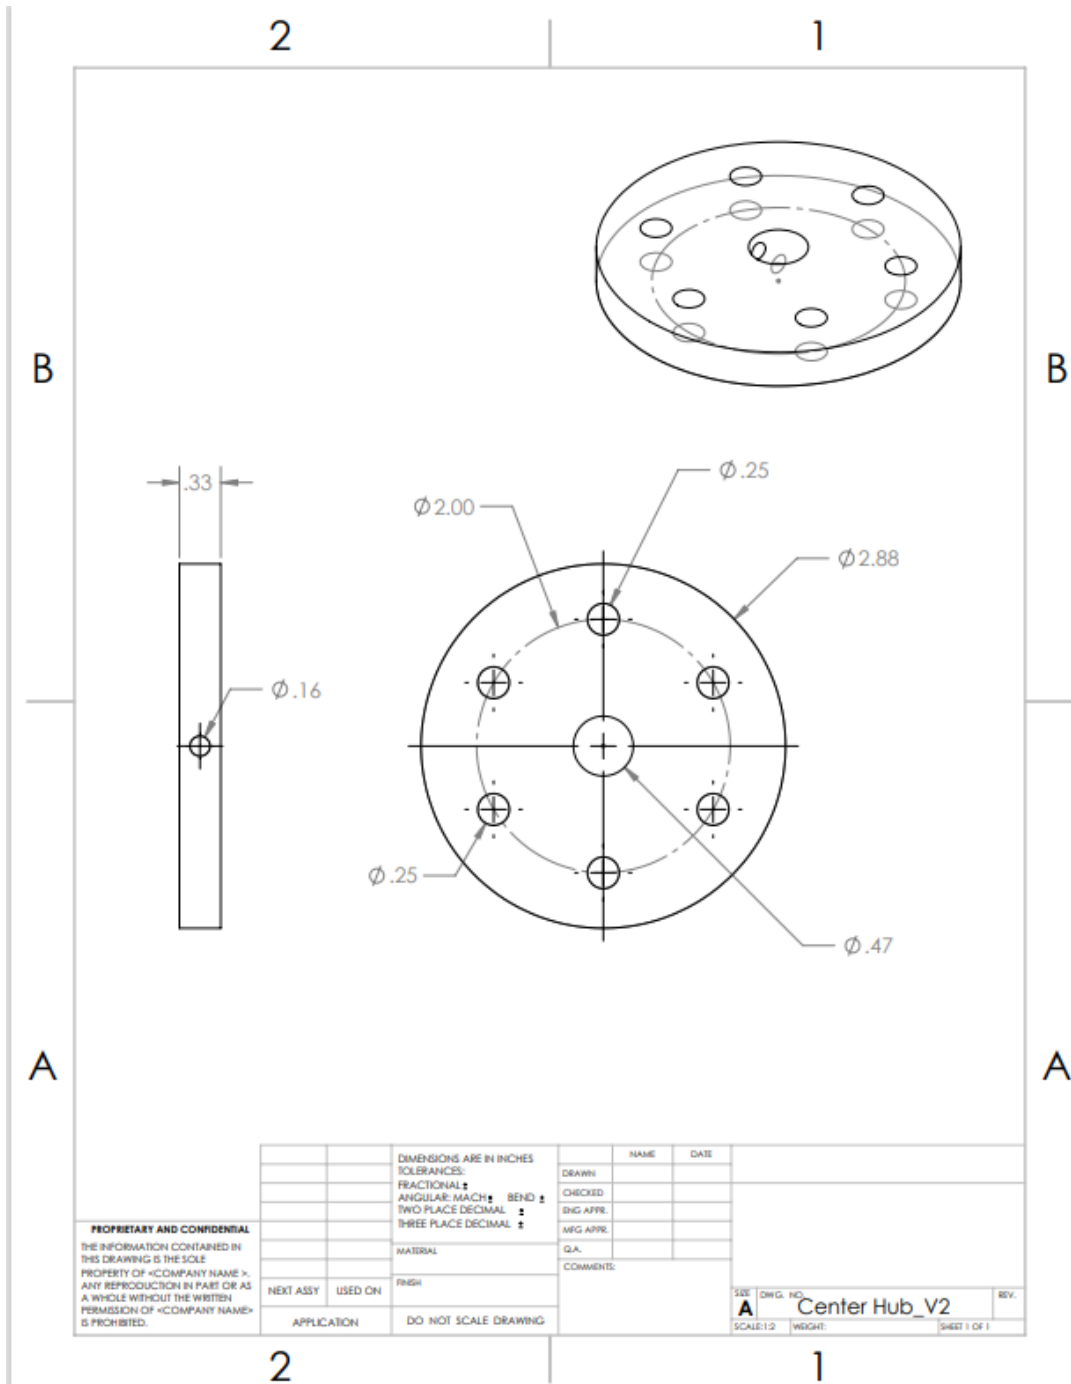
Rotary Encoder Test Fixture Secondary Hub “Drawing File”
